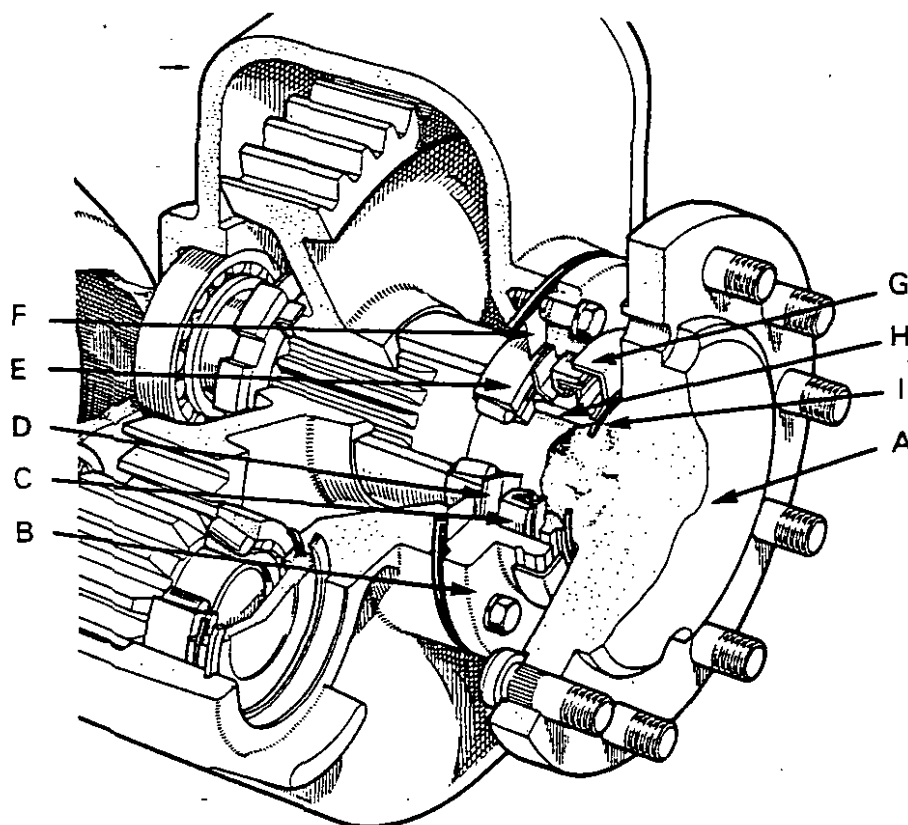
FINAL DRIVESHAFT OIL SEAL — 990 TRACTOR
